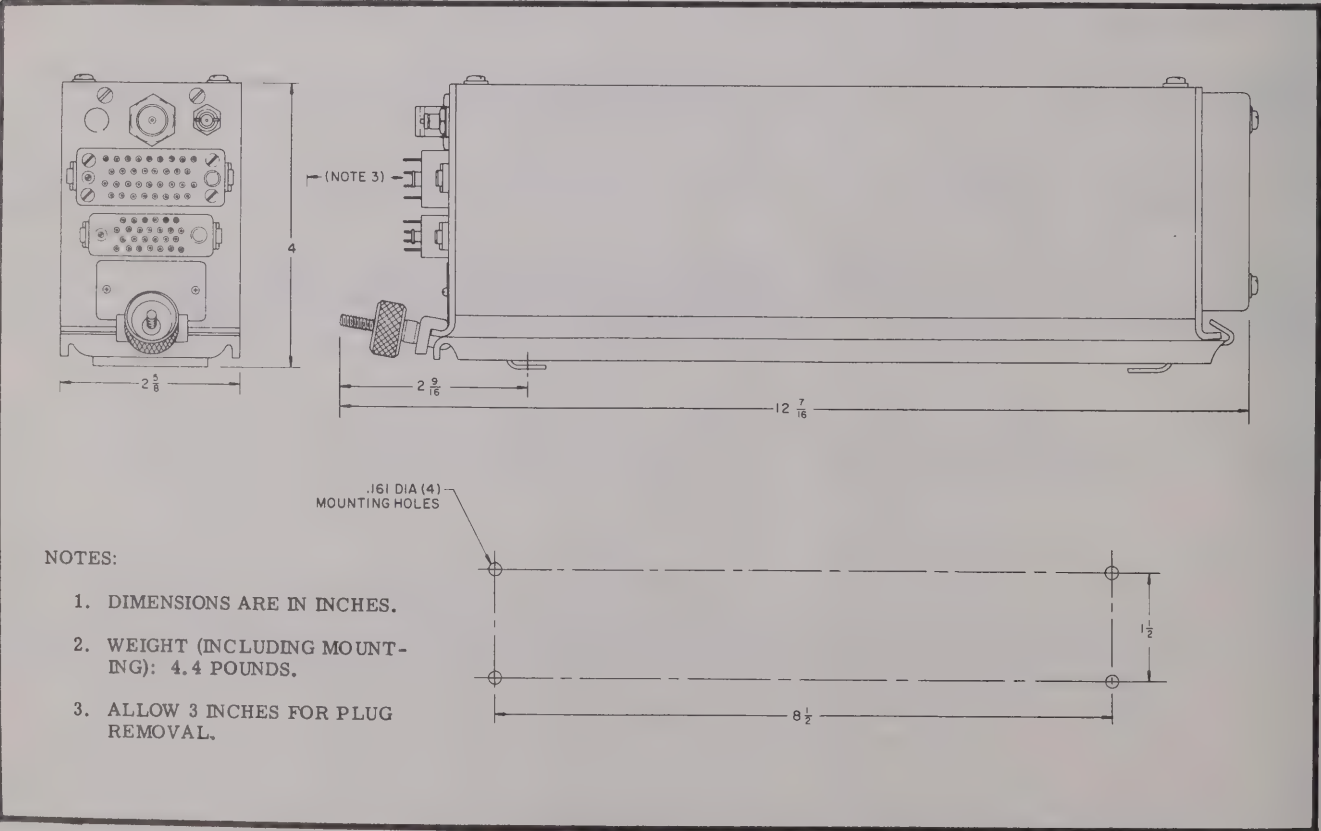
37260 Receiver-Transmitter with Mounting 36450, Installation Dimensions
